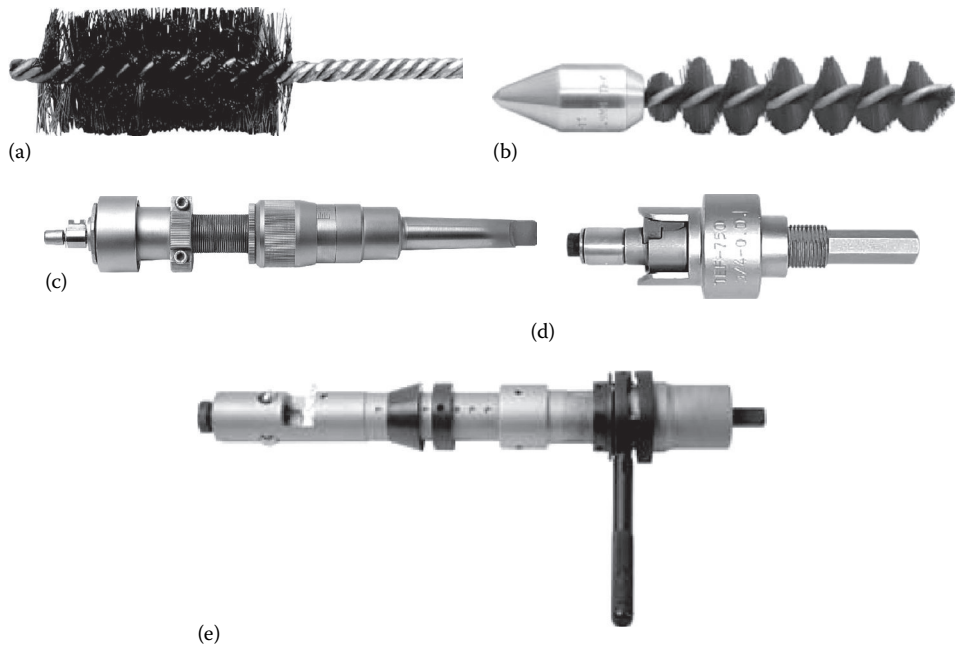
Accessories for tube expansion. (a) Tubesheet hole brush, (b) tube guide, (c) serrating/grooving tool, (d) tube end facer, and (e) internal tube cutter. (Courtesy of Powermaster Ltd, Mumbai, India.)
